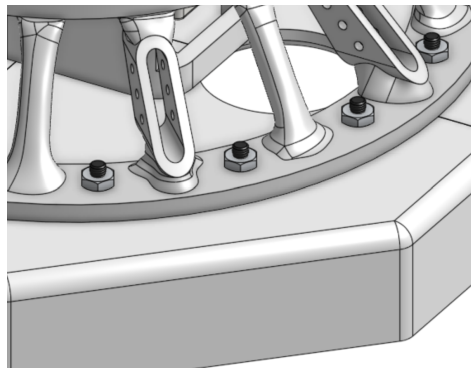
Support arms secured to the base plate using #10-32 bolts and nuts.
